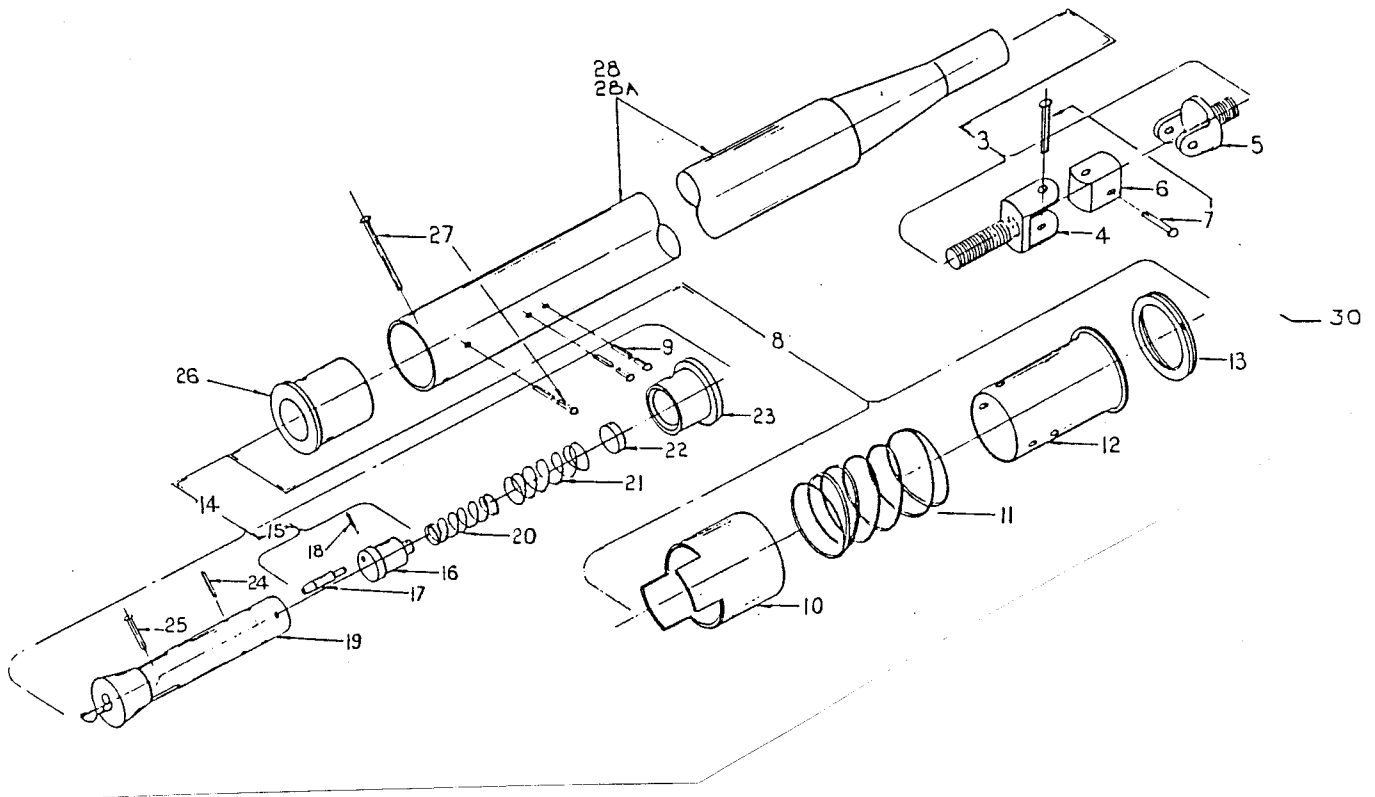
A2866-3 AND -4 STRUT ASSEMBLY
